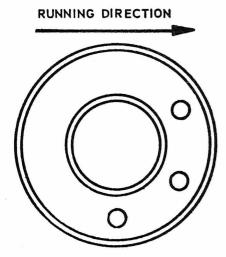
Motor mount blocks (14-Fig. LM1-9) on late models, are provided with three dampening holes as shown. Blocks should be assembled with one hole directly at the bottom and others toward front.
